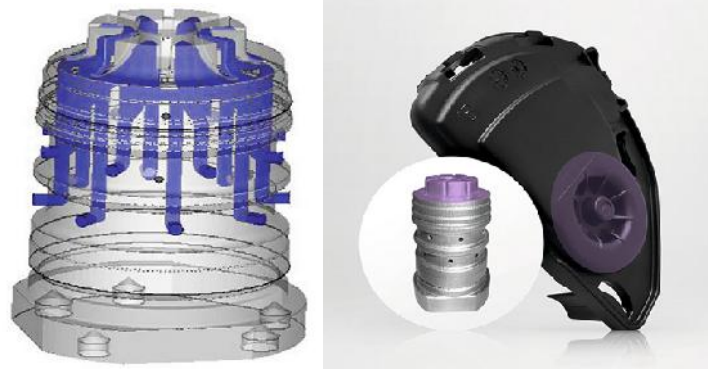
A 3D view of the inner cooling channels of a tool insert, which could not be manufactured using conventional machining [3]
